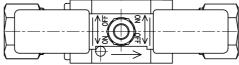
Ball valve - manometric stop (971 41 ..), dimensional drawing
